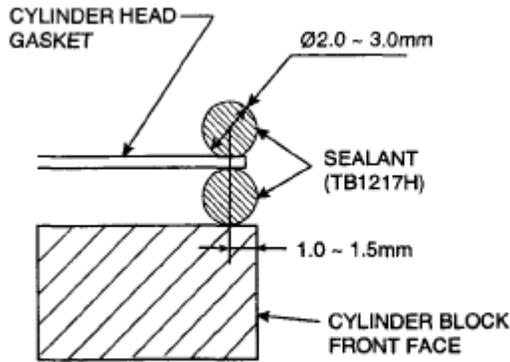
Identifying Sealant Applying Dimension On Cylinder Block Top Face
